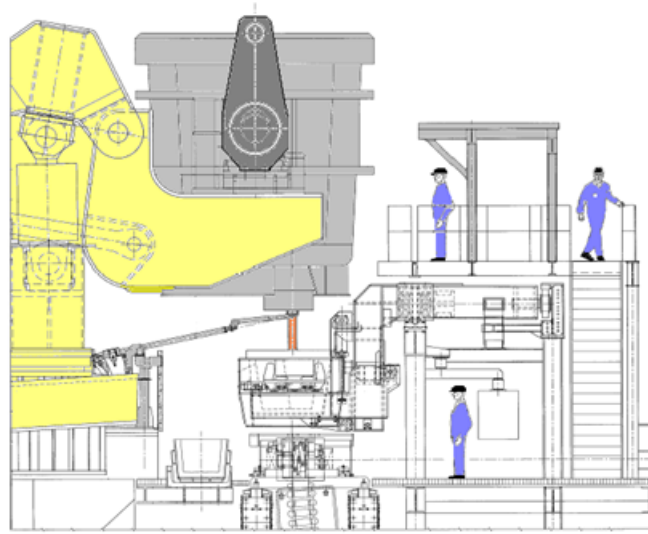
Schematic of the tower arm with the ladle in casting position
